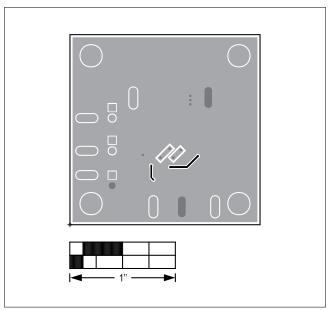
MAX15462C 12V EV Kit PCB Layout—Solder Side
